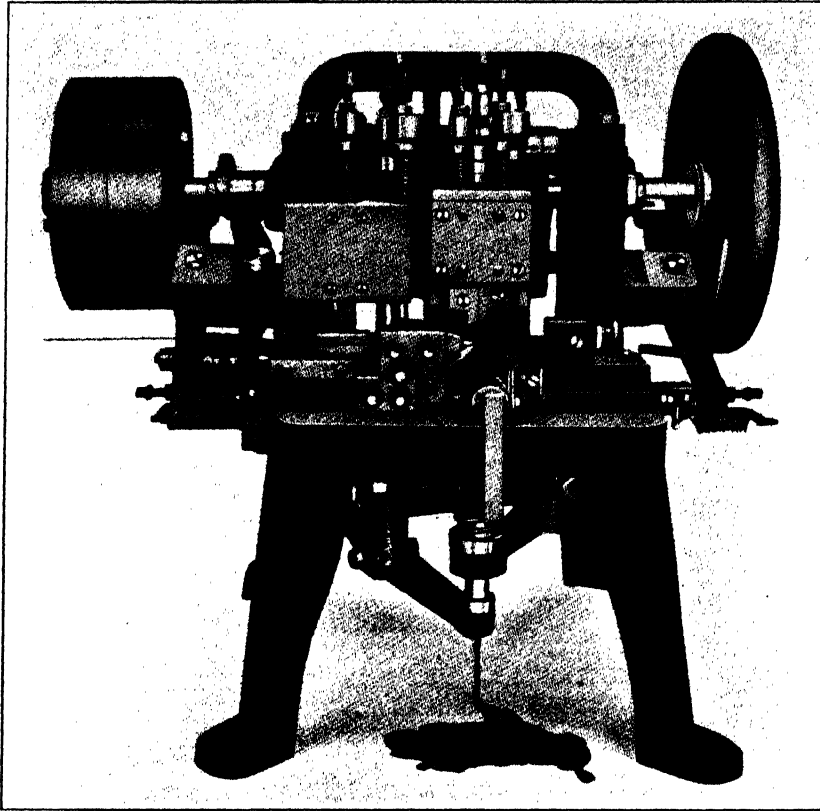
CURB CHAIN MACHINE WITH TOP TWISTER.
